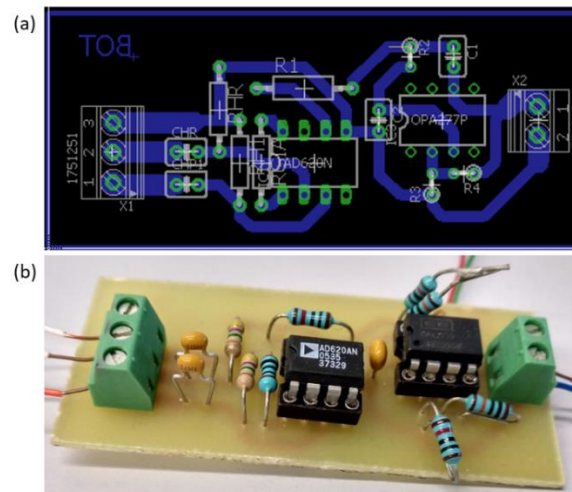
Electrophysiology amplifier. (a) Design of the PCB (Printed Circuit Board). (b) Assembly of components on the PCB.
